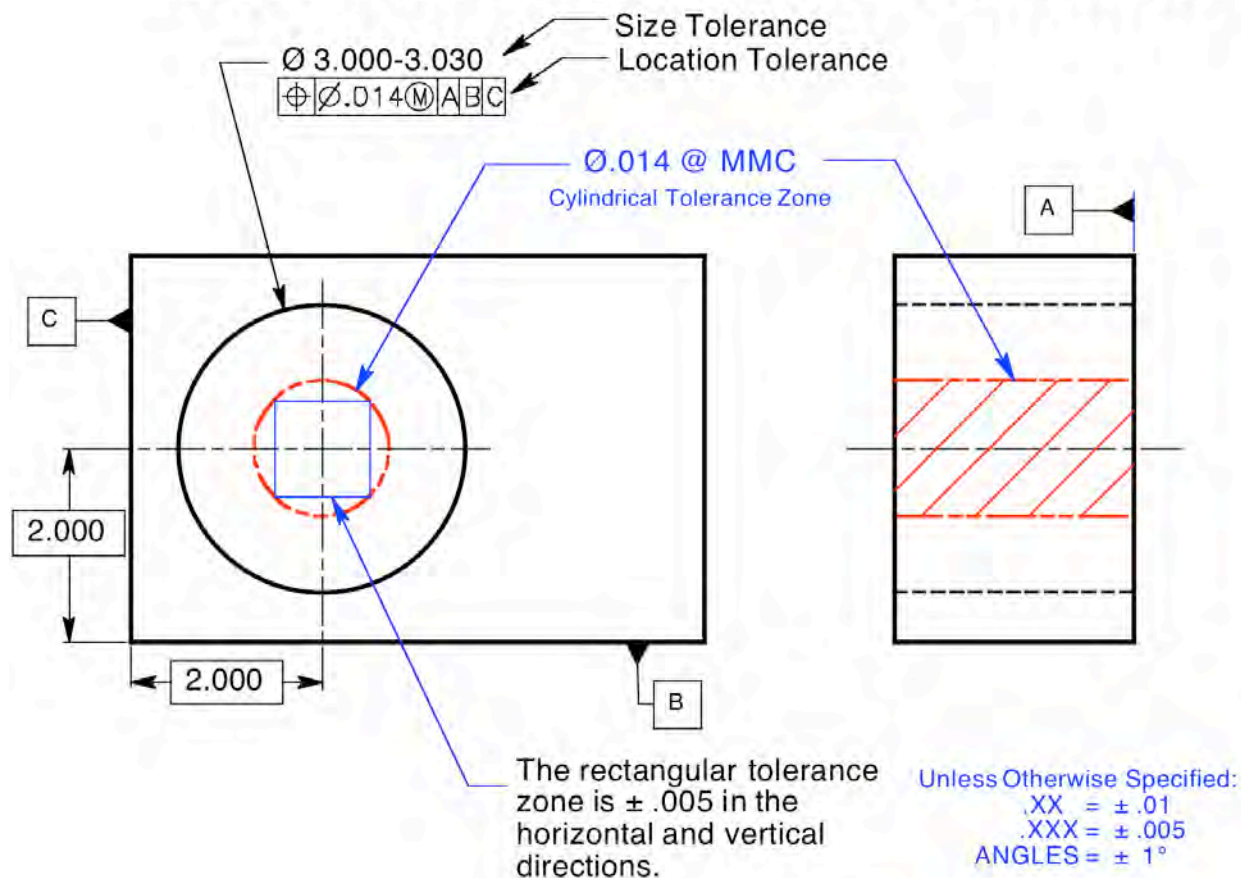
The cylindrical tolerance zone compared to the rectangular tolerance zone
